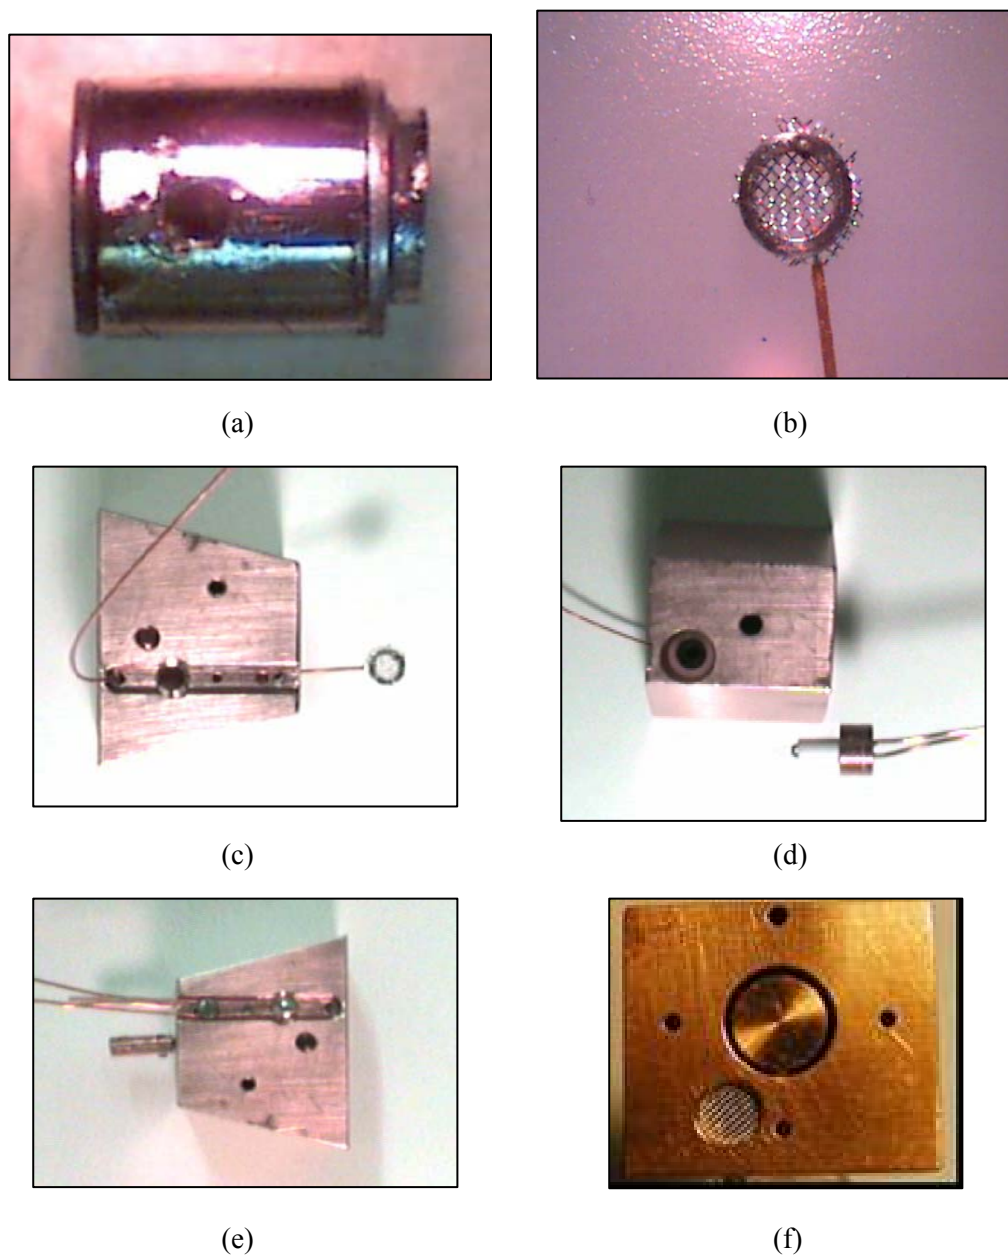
Details of the electron flood gun assembly. (a) Assembled Wehnelt can (7 mm in length) with threaded (#0-80) hole for electrical contact screw. (b) Grid anode (5 mm dia.) with electrical contact wire. (c) Sample block module (side view) with grid anode being inserted. The narrow groove provides a track for anode, and Wehnelt can wires along with the electrical screw-terminal and the set screw that secures the full mechanical assembly inside the module. (d) Sample block module (bottom view) and tungsten filament on ceramic base, mounted in a copper ring ready for insertion into module. (e) and (f) Fully assembled sample block modules (side view and top view).
